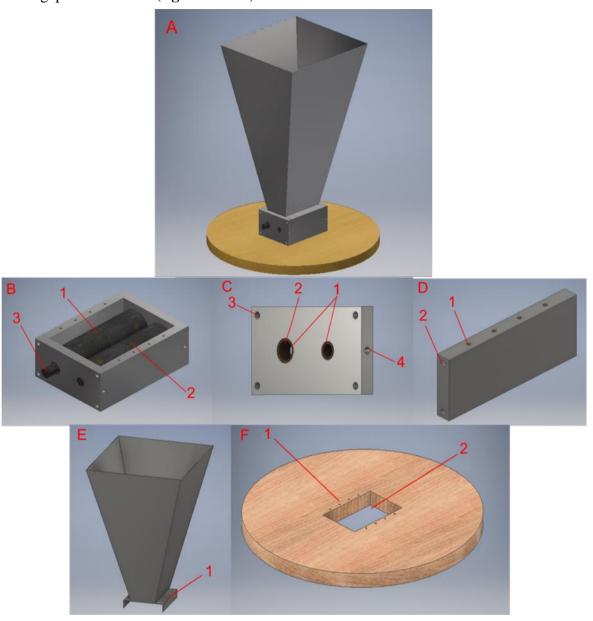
Two-roll mill: A) assembled mill | B) rolls assembled in their support: 1) main roll; 2) warrant roll; 3) main roll shaft; | C) right lateral support plaque: 1) cooper bushes; 2) main roll shaft fitting; 3) frontal punctures; 4) lateral punctures; | D) frontal roll support plaque: 1) superior punctures; 2) lateral punctures; | E) mill hopper: 1) lateral punctured flaps; | F) mill base: 1) top punctures; 2) mill gap;
